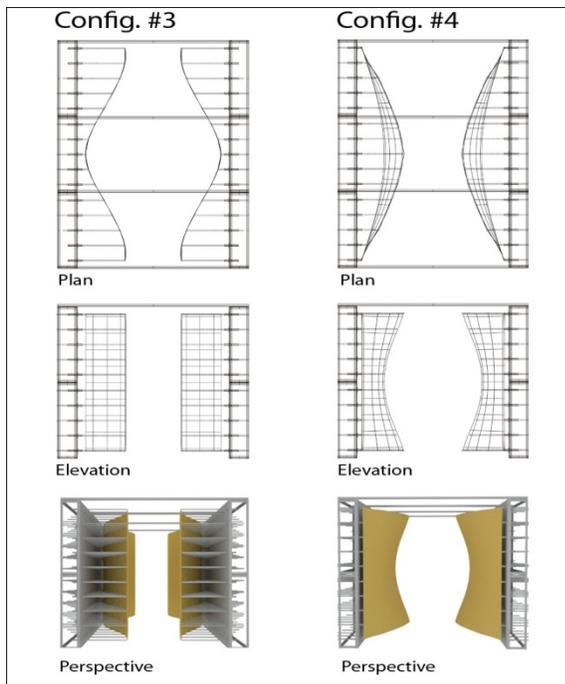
(Faulkner) Machine Positions 3 and 4: Plan, Elevation, and Perspective
